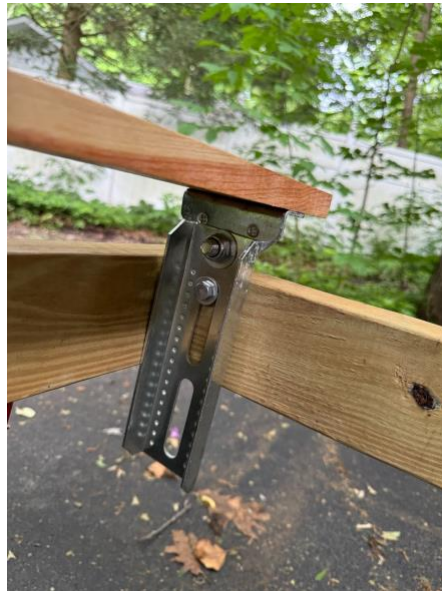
Installing bunk brackets on the existing wooden frame. Carpet was added to the bunks later.
